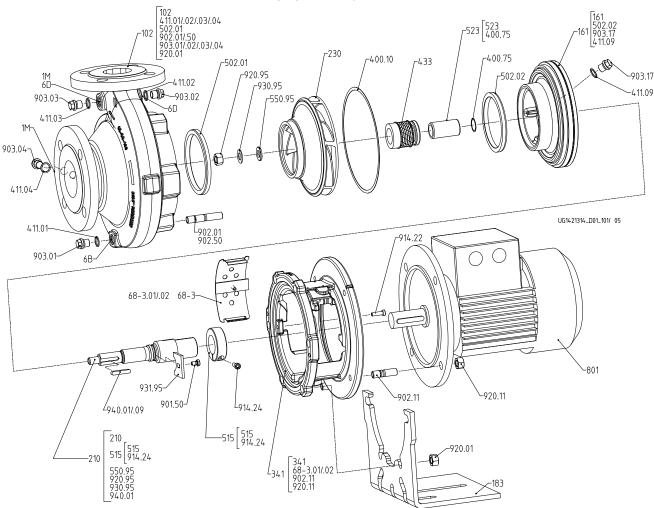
Model with single mechanical seal and clamped casing cover, without pump foot
